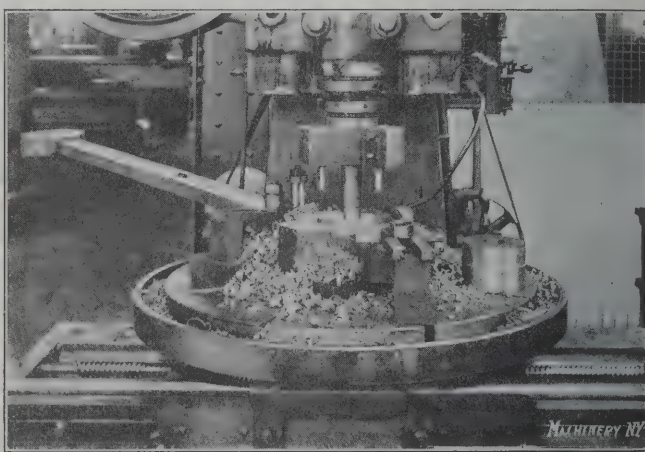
Head with Three Cutters, used for blocking out the Ends of Solid Connecting-rods
